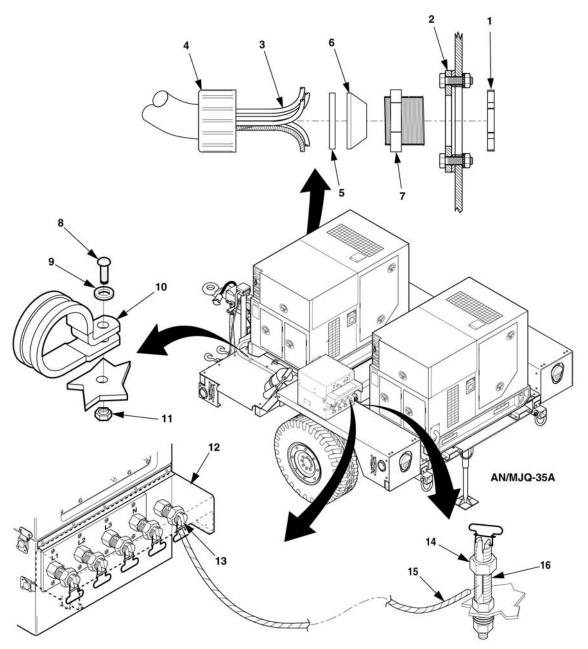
Installation of Power Cables on AN/MJQ-35A (Sheet 3 of 3).
